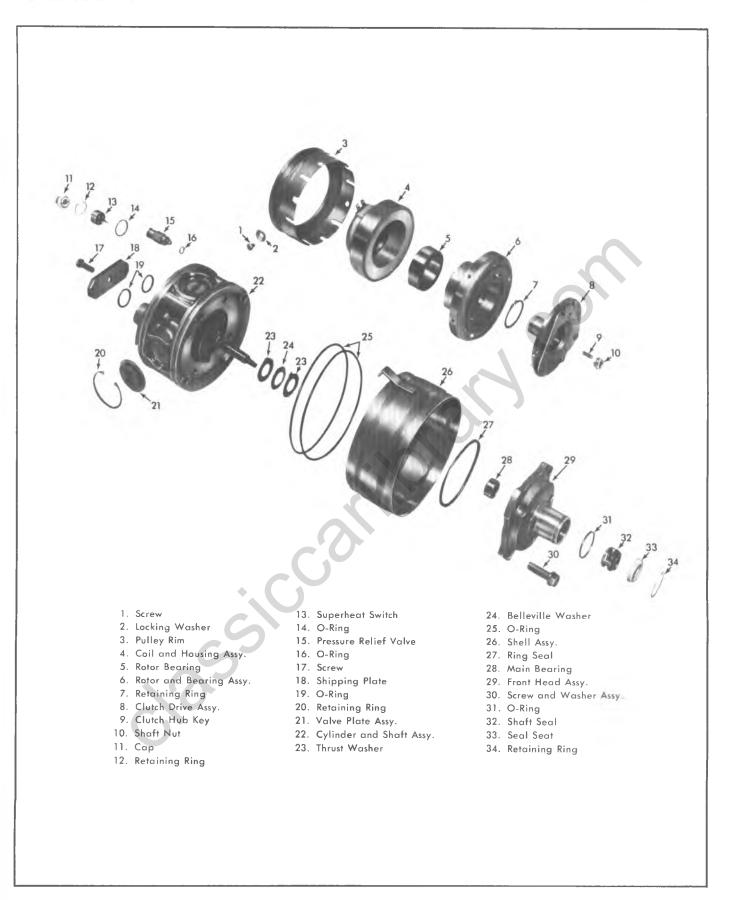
Radial Four Cylinder Compressor - Exploded View
